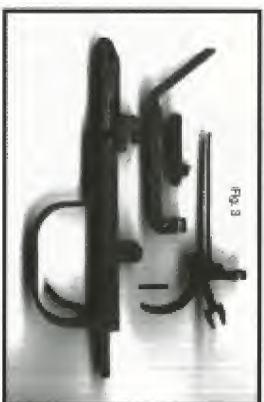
Drive out bolt follower pin, lift out bolt follower and spring, drive out trigger pin, lift out trigger and sear disconnector and safety spring. Squeeze disconnector and lift out. Drive out safety lever pin, remove safety (safety removal is optional).
